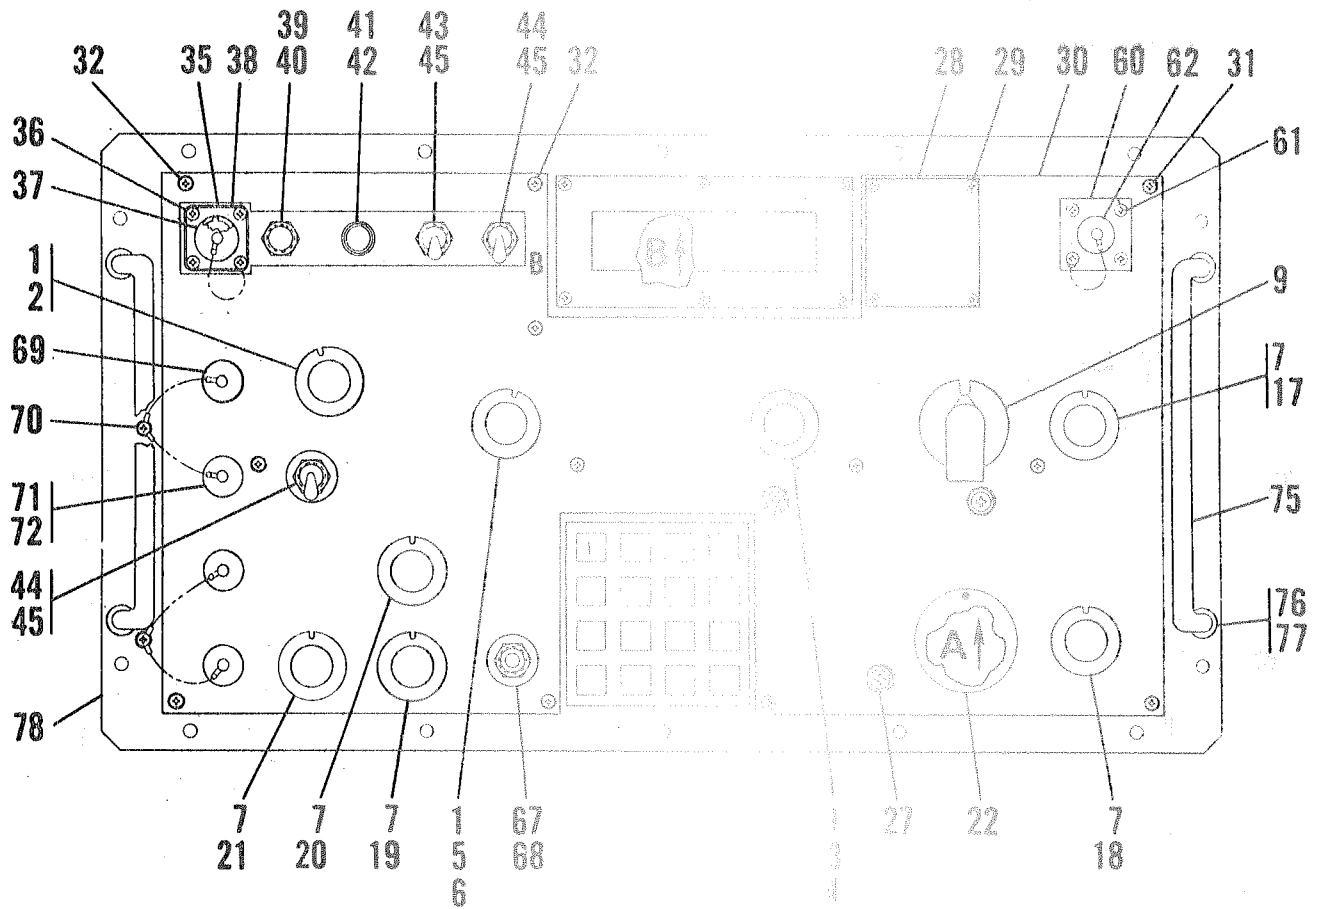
Test Set, Electronics Assembly (Sheet 1 of 6)
